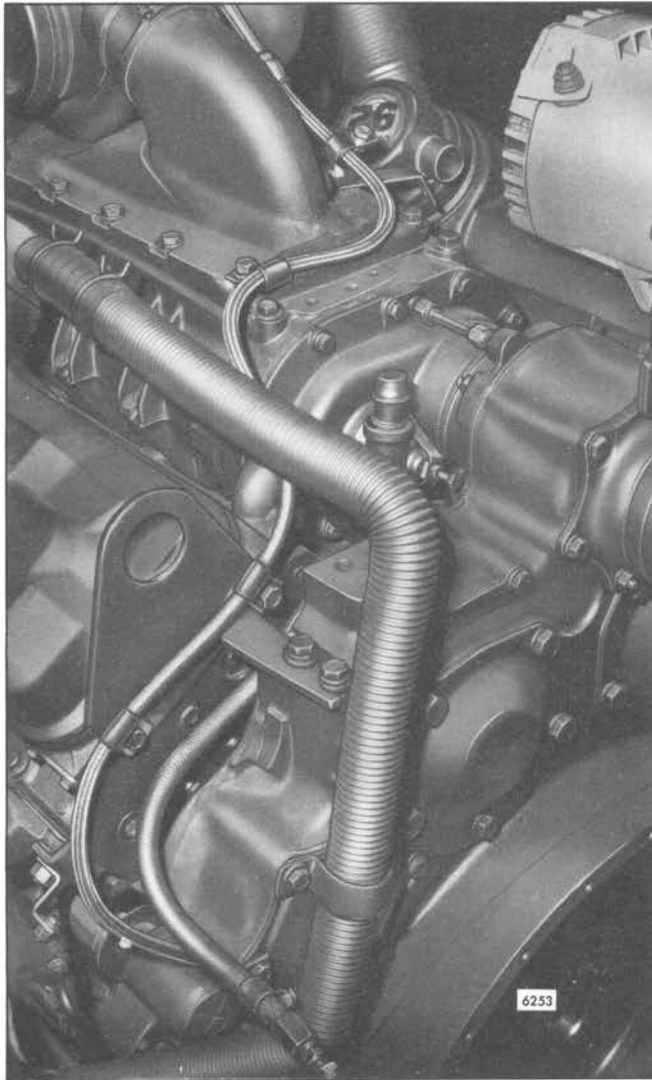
Typical 8V-92 Left-Bank Turbo Oil Supply Hose Routing
